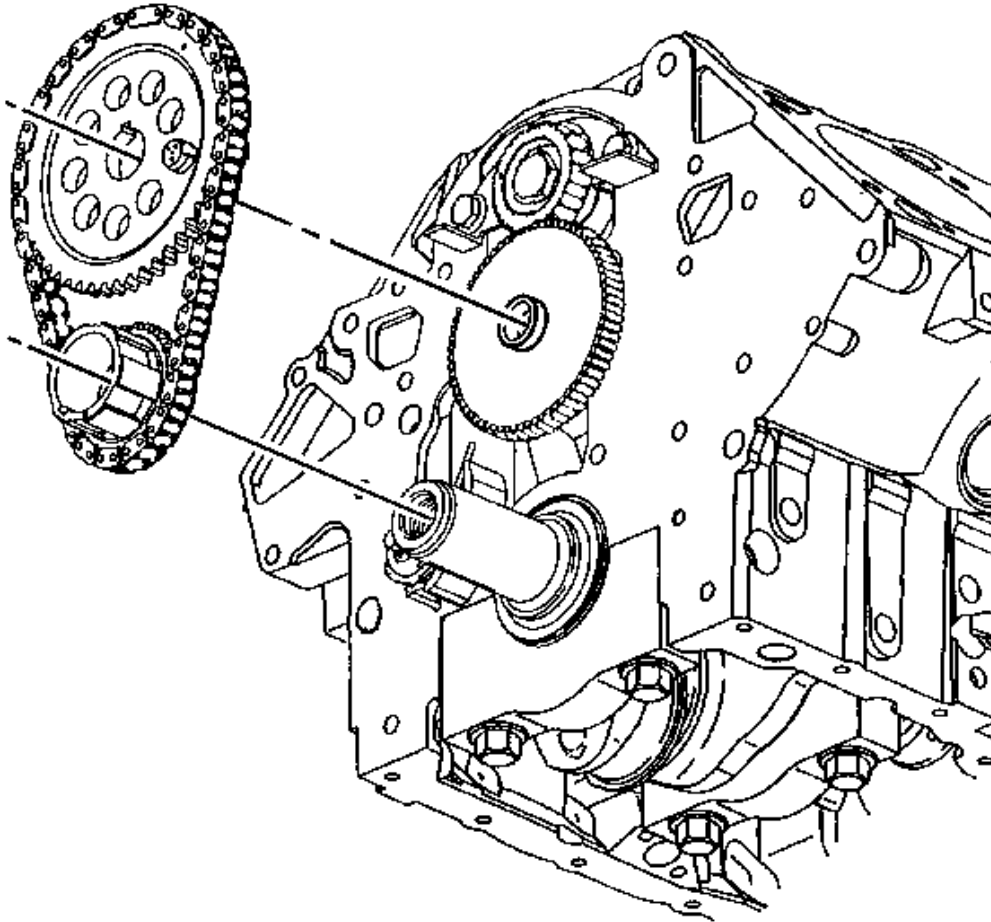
Removing Camshaft Sprocket & Timing Chain
